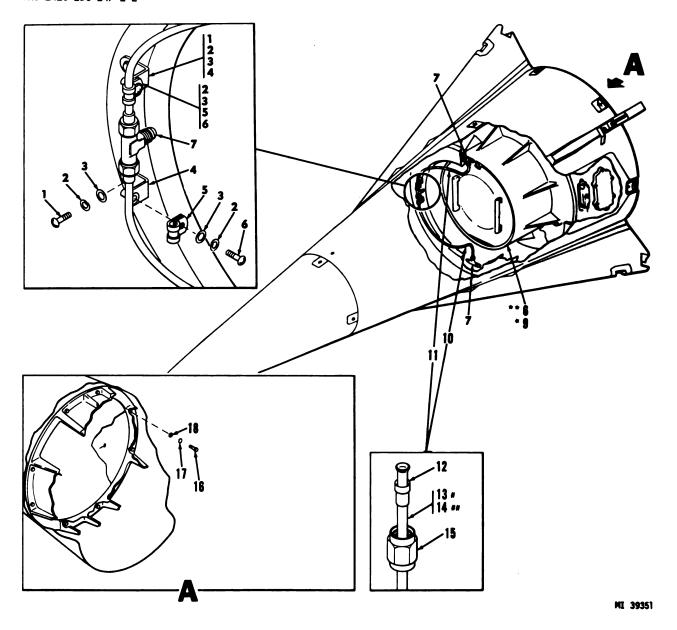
SECTION ASSEMBLY, NOSE /8530476/ /SEE FIGURE 34 FOR NEXT HIGHER ASSEMBLY/
